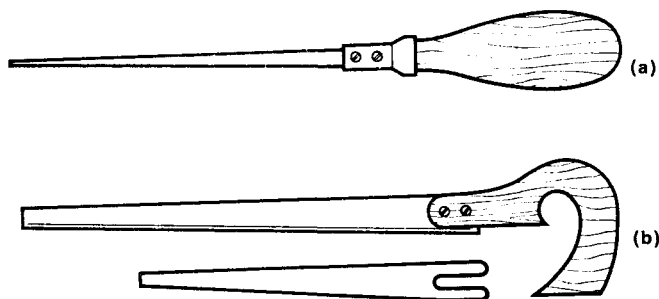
(a) Keyhole or pad saw for cutting internal holes and shapes. (b) Compass saw with interchangeable blades for cutting large curves.
